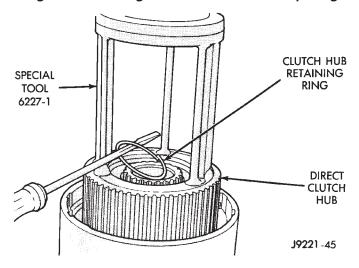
Removing Direct Clutch Hub Retaining Ring
